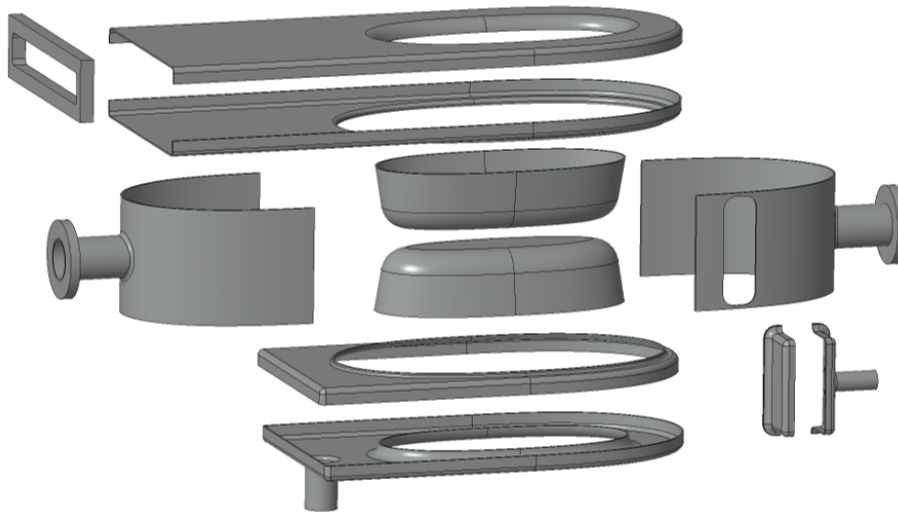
The fabrication and welding plan for 197 MHz DQW cavity.
